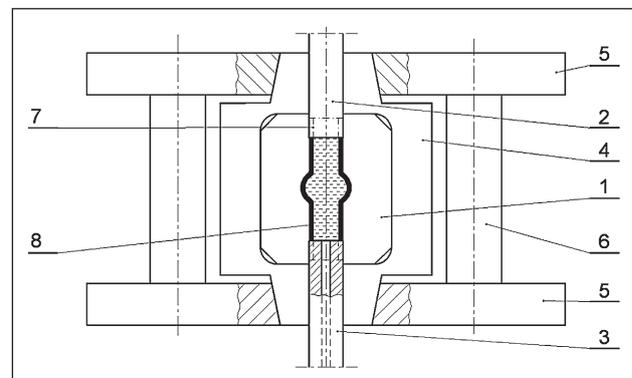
Diagram of the main part of the hydromechanical bulge forming tool, where: 1- die insert, 2- upper punch, 3- lower punch, 4- half-die, 5- pressure platens, 6- guide-posts, 7- tube segment, 8- hydromechanically bulged axisymmetric component.
